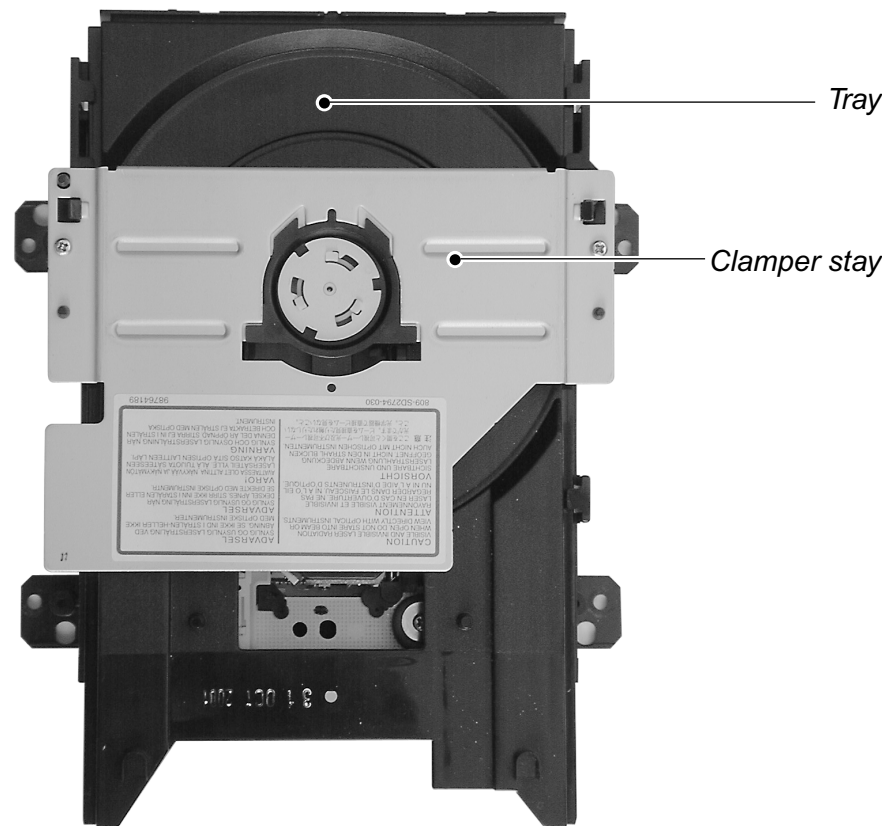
Pickup mechanism chassis assembly (Top side)
